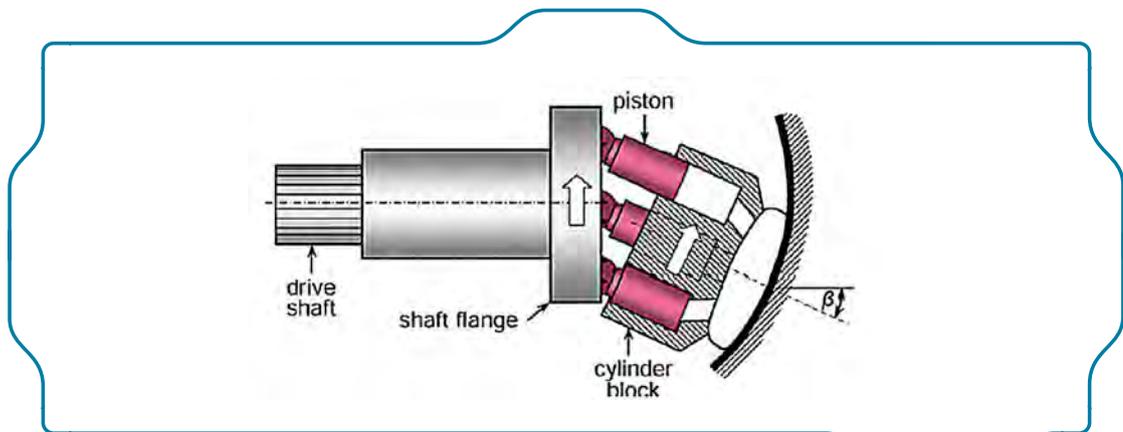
Schematic representation of a variable-displacement hydraulic motor of axial-piston bent-axis type, showing the cylinder block with pistons and the drive shaft flange. The piston displacement can be varied by changing the setting angle β between the shaft axis and the cylinder block axis.
